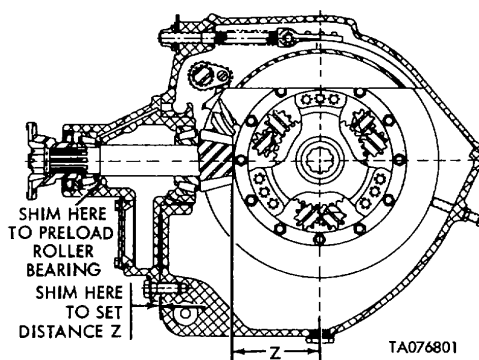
Shims Installation to Set Gear Shaft to Dimension Z
